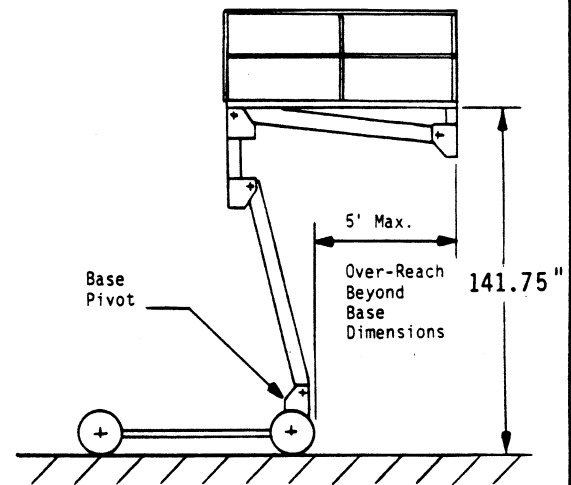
FIGURE SHOWS PLATFORM OVERREACH WHEN THE LIFT ASSEMBLY LOWER ARM IS OPERATED ONLY.
